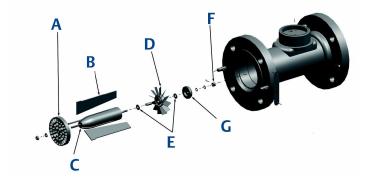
Internal Assembly for a Nominal Pipe Size DN80 to DN100 (3-in to 4-in) Liquid Turbine Meter
